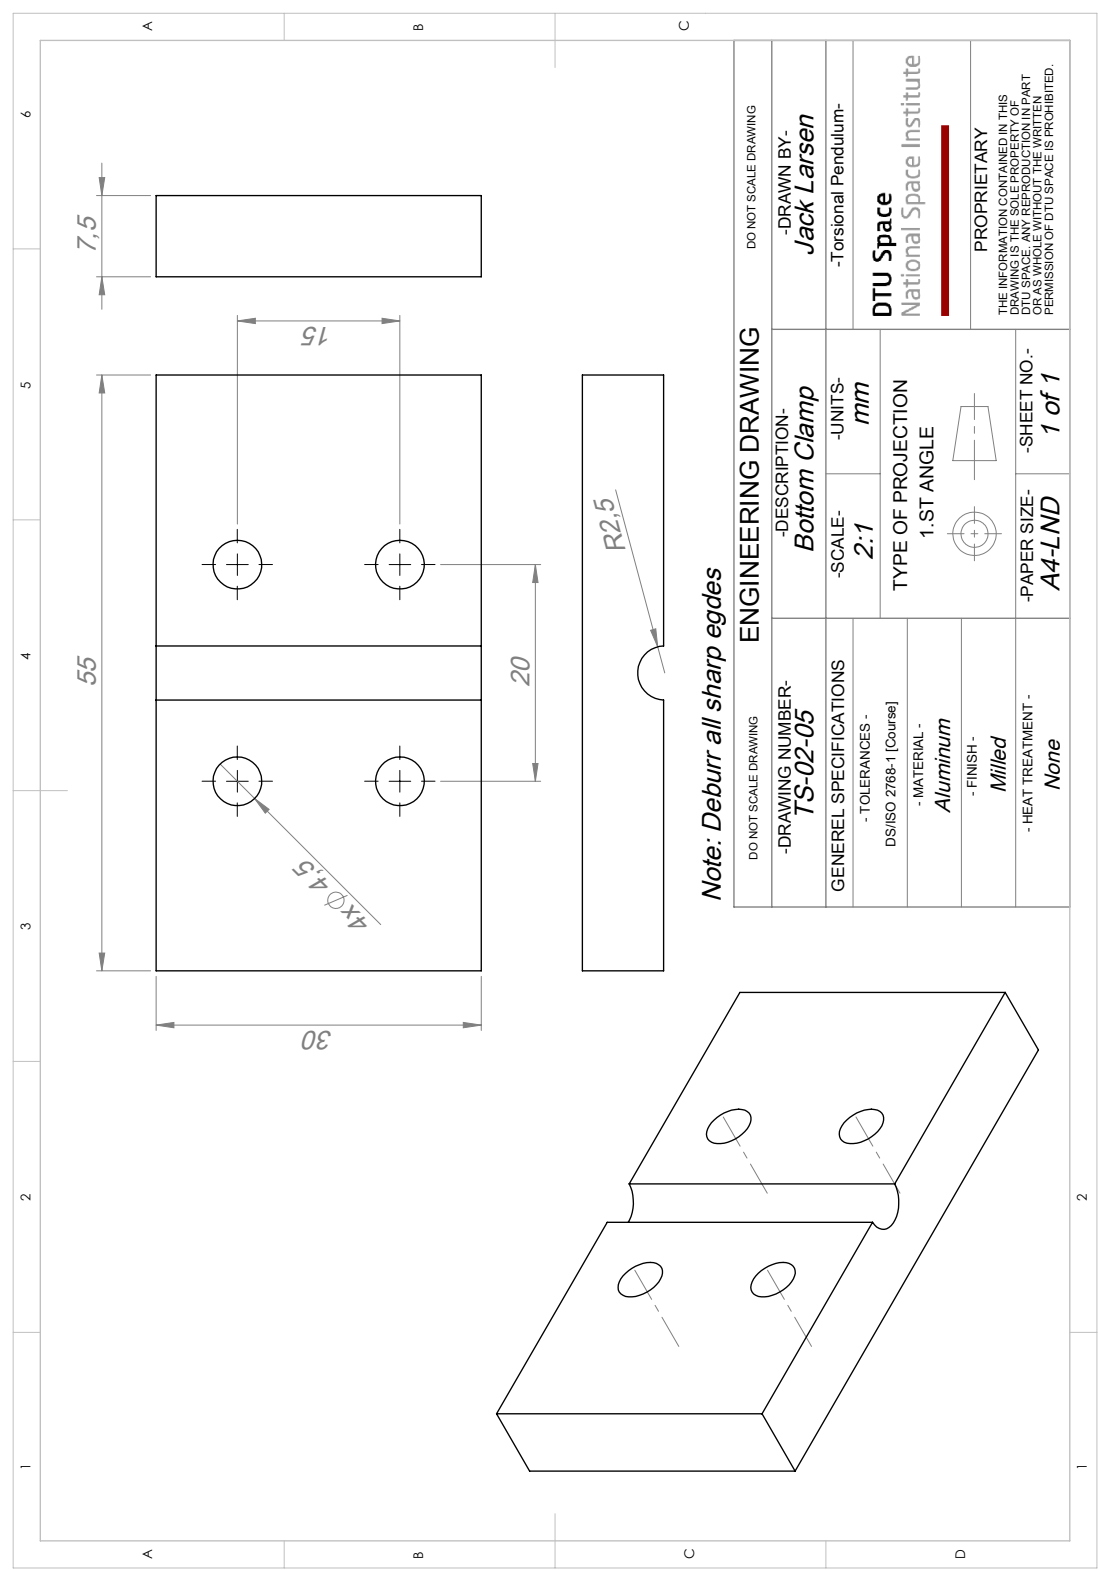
Test Setup: Bottom clamp for fixing the glass wire.
